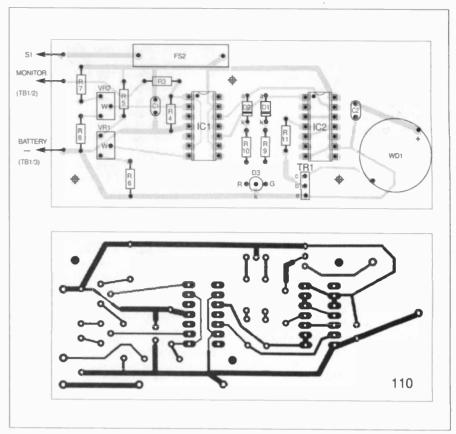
Printed circuit board topside component layout and full size underside copper foil master pattern.
